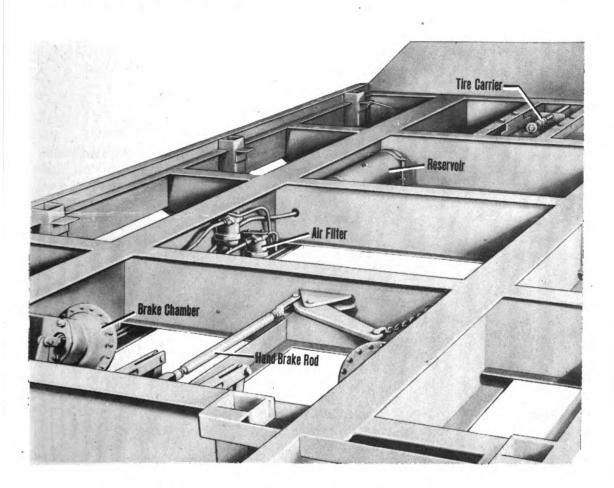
Looking Down on Full Bed of Trailer, with Platform Removed.
